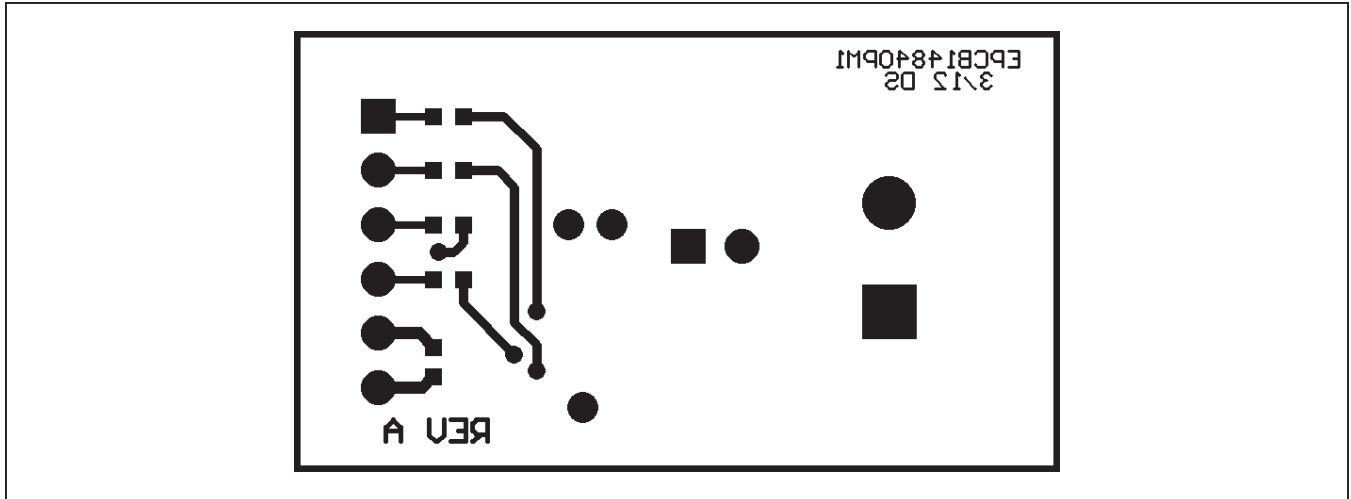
MAX14840PMB1 Peripheral Module PCB Layout—Solder Side
